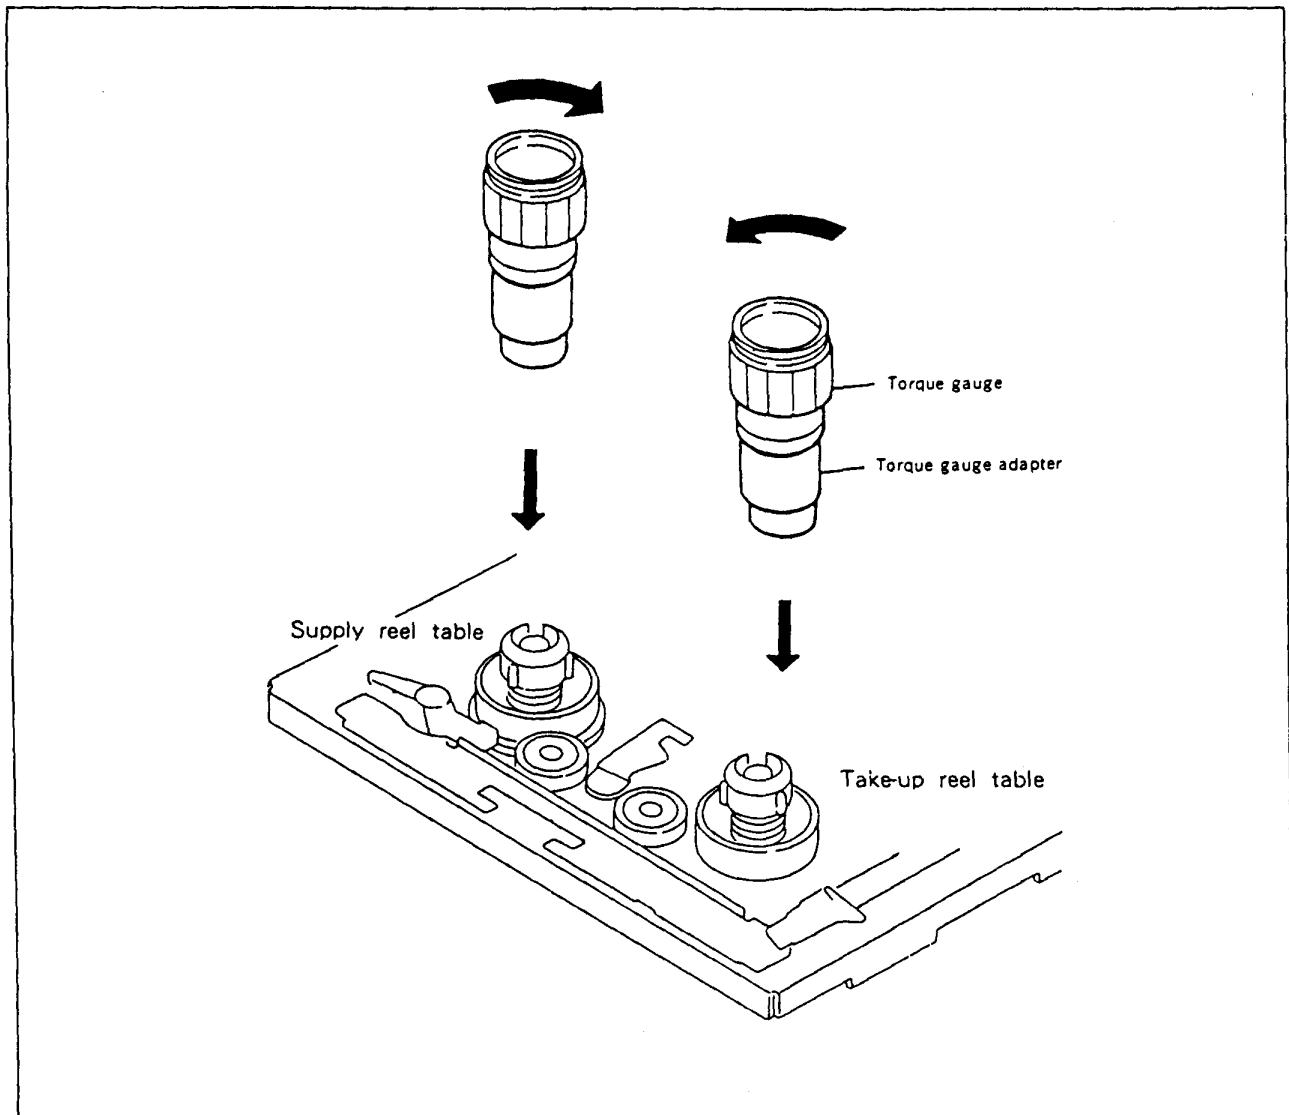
Checking REW/FF/PLAY Torque
